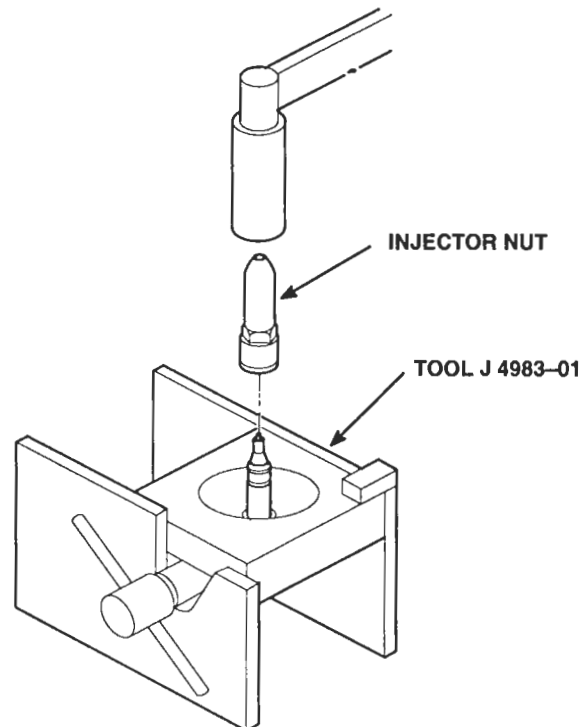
Tightening Injector Nut with Torque Wrench using Tool J 4983-01
